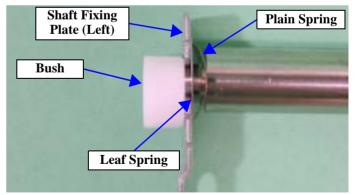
Order on Left End of Carriage Guide Shaft A
